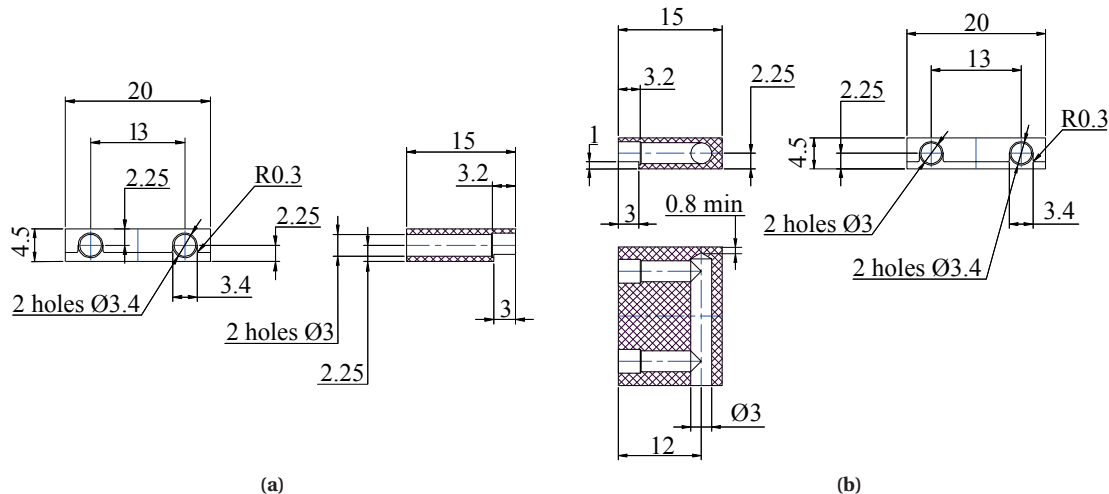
Technical drawings of the OB3 half-stave inlet/outlet connector (a); and the Π -bend connecting the two polyimide channels (b). A plug is installed in the Π -bend piece to close the lateral hole. Dimensions in mm. Drawings provided by the ITS Upgrade Mechanics and Cooling working package.
